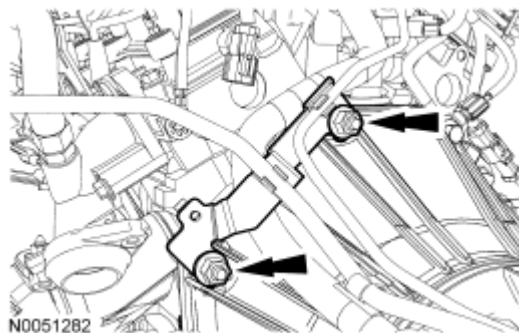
Locating Fuel Tube Bracket Aside & Nut
